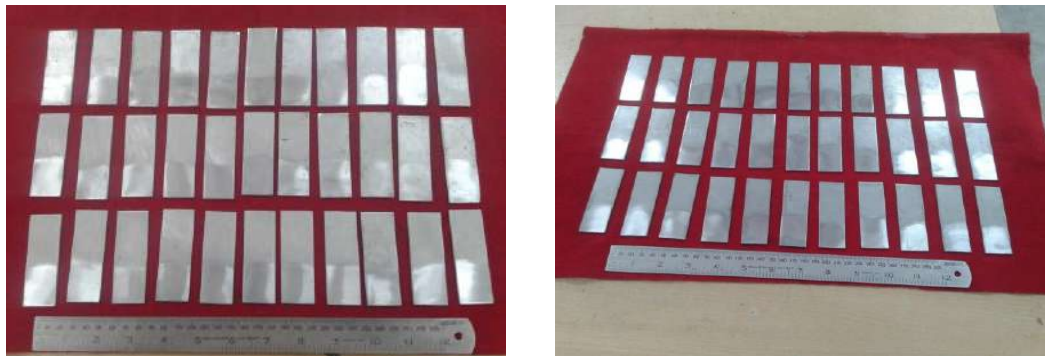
Photographic view of the AISI1020-AA1008 samples before the weld
